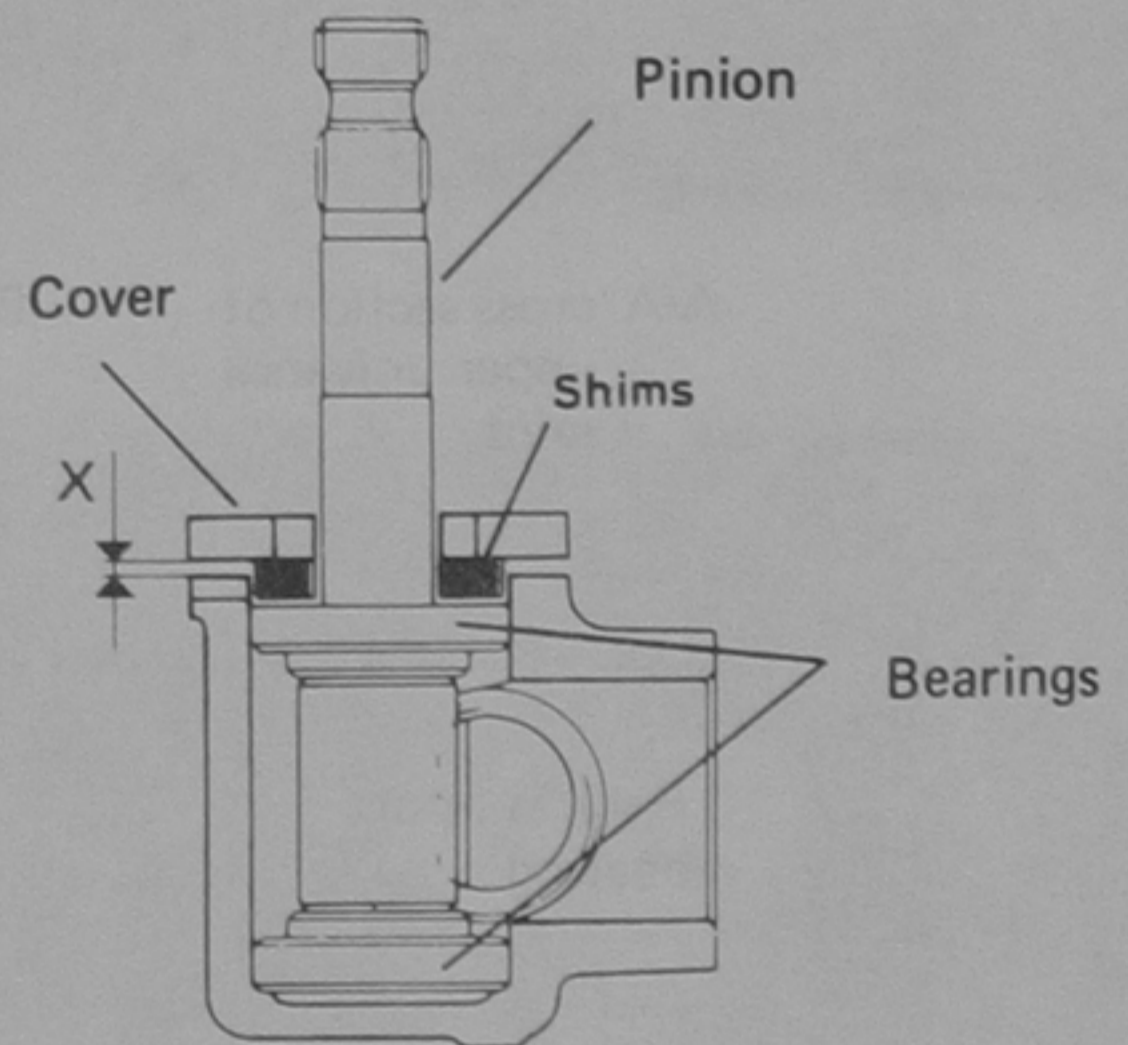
Pinion bearing cover clearance (X) (Sec 11)
